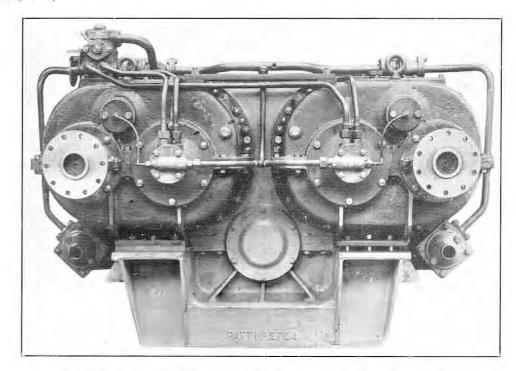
S.L.M. Twin-Engine Marine Gearbox; Modern Wheel Drive, Limited.
